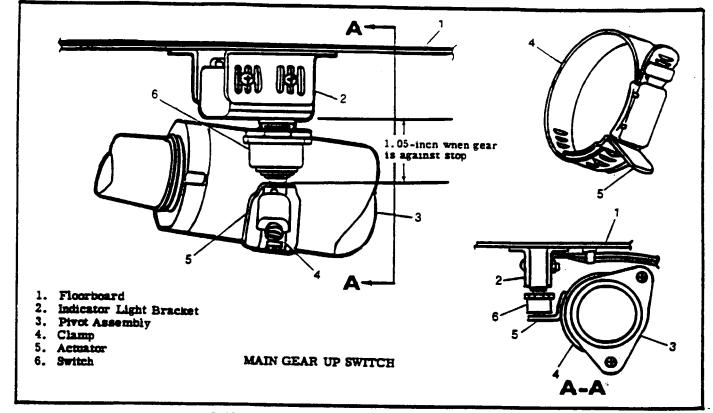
Rigging Main Landing Gear (Sheet 3 of 3)
